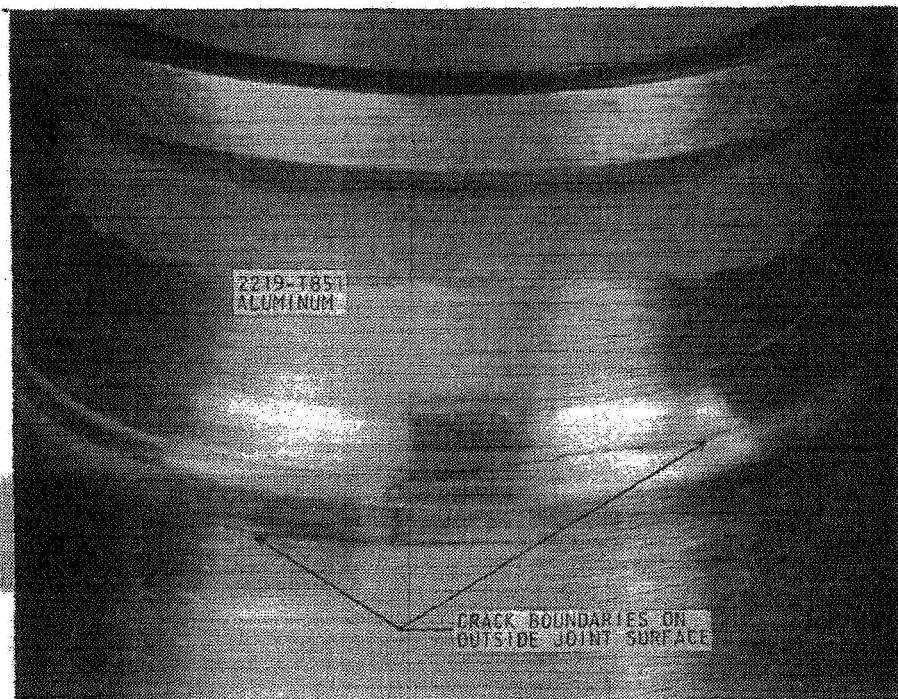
Fatigue Failure of Swaged Joint
